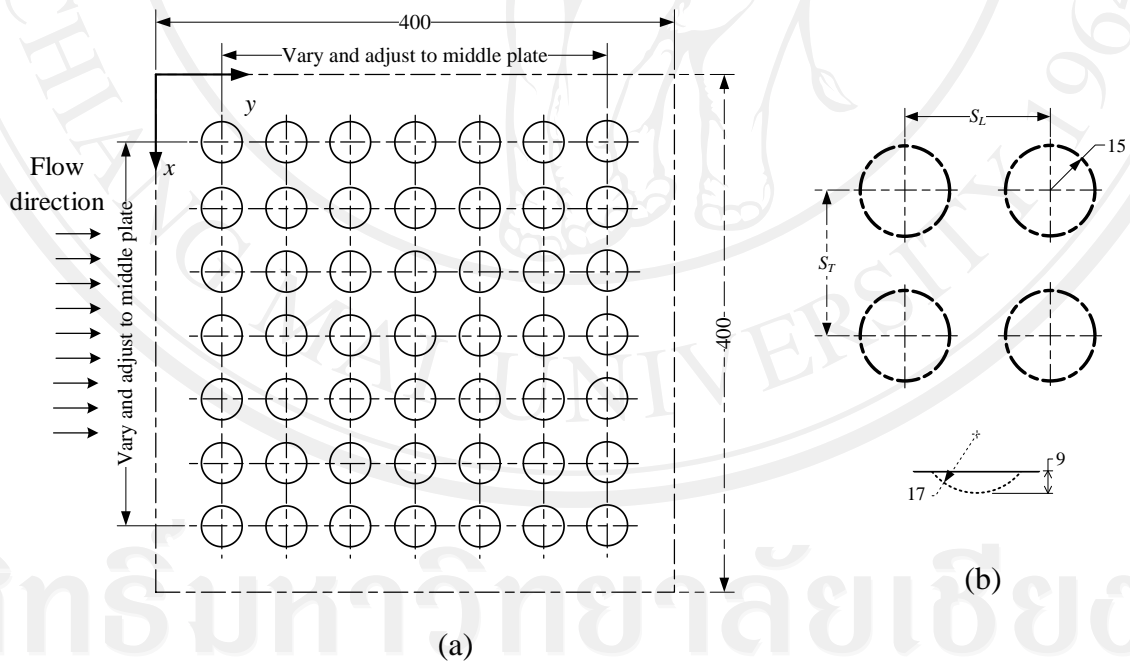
Details of: (a) dimpled-tested surface for inline arrangement, and (b) individual dimple geometry. All dimensions are in mm.
